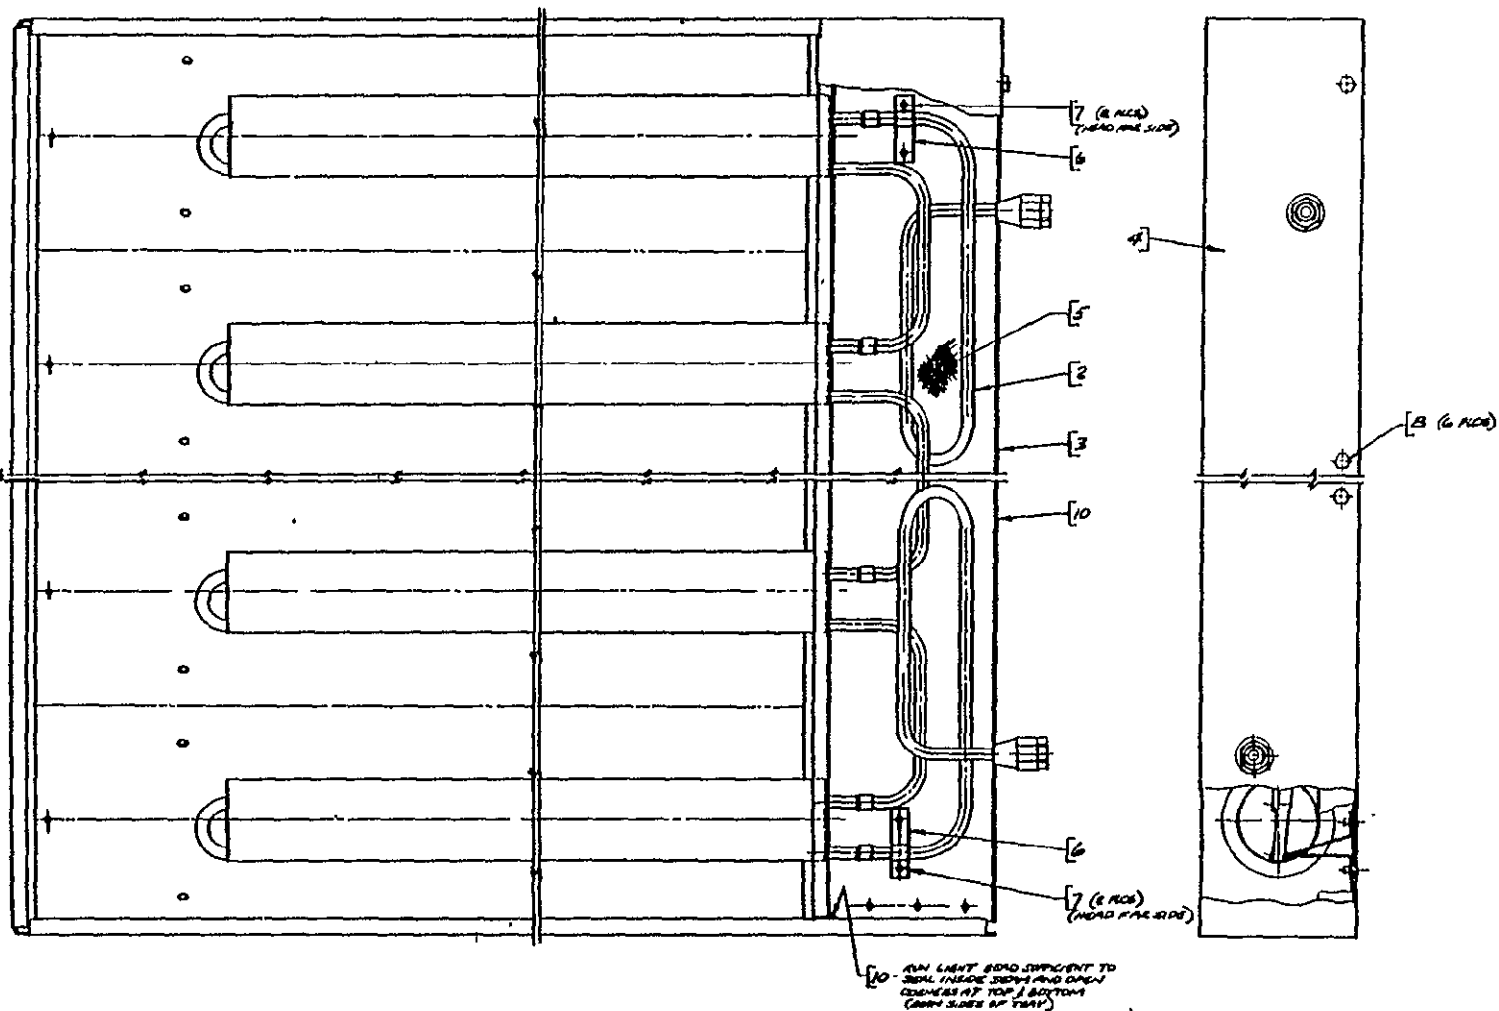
Collector Shroud Subassembly
